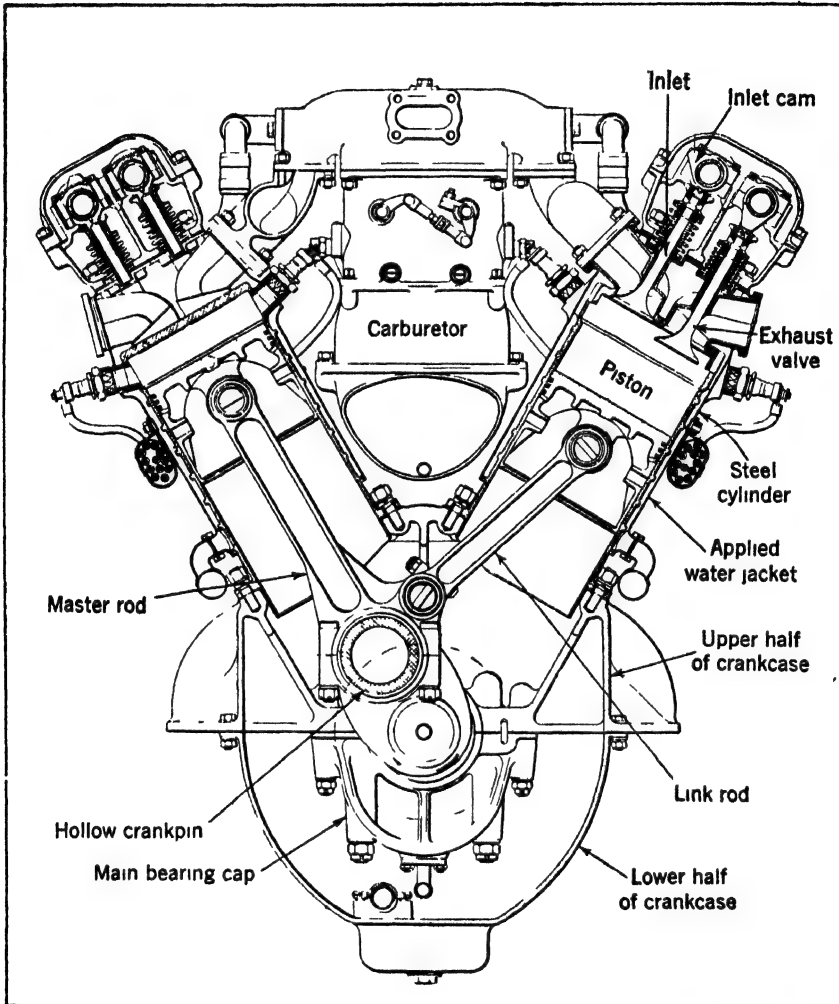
Transverse Sectional View of Fiat A20 Aviation Engine, Showing Method of Valve Actuation by Side by Side Camshafts and also Outlining Clearly Cylinder and Crankcase Construction.
